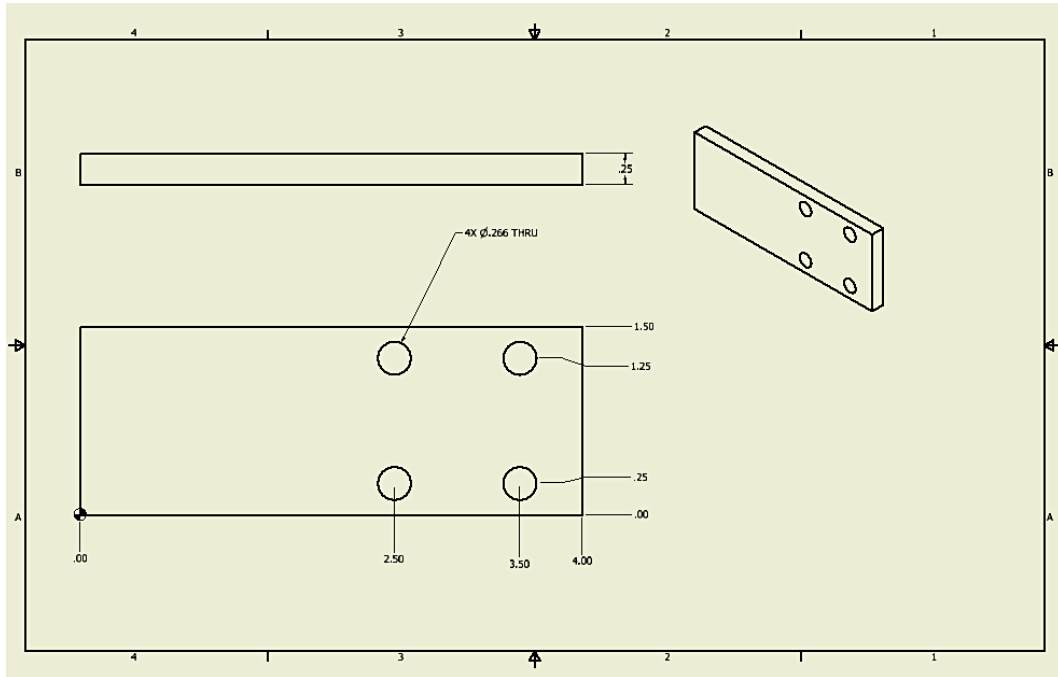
Dimensional drawing of connector for steel brace and chamber
